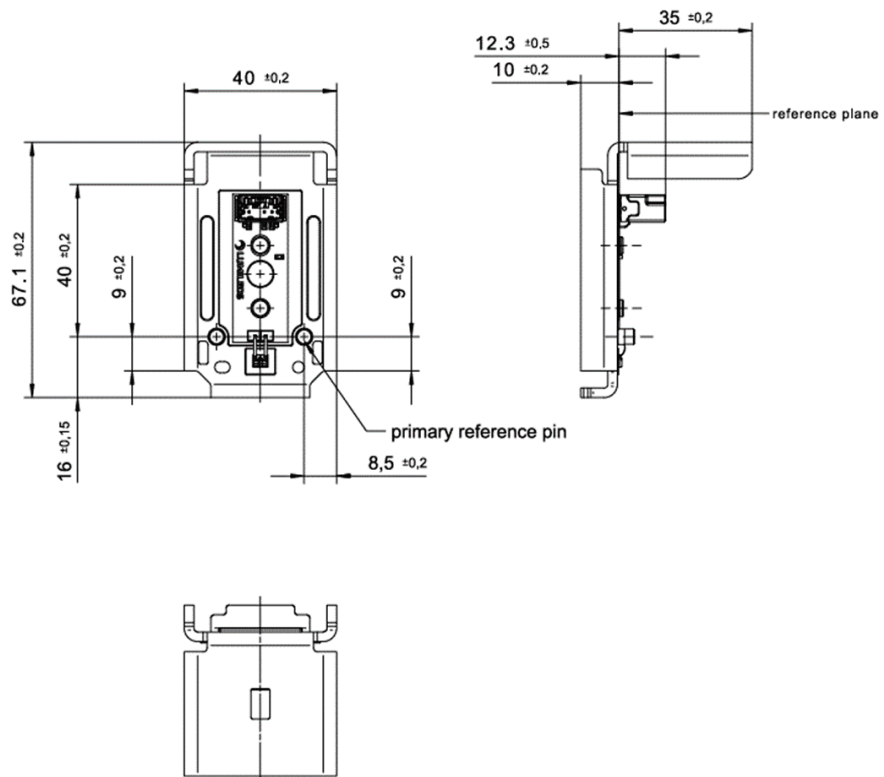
Mechanical dimensions in mm of the LUXEON Go 1x3 slave module with heatsink type A
